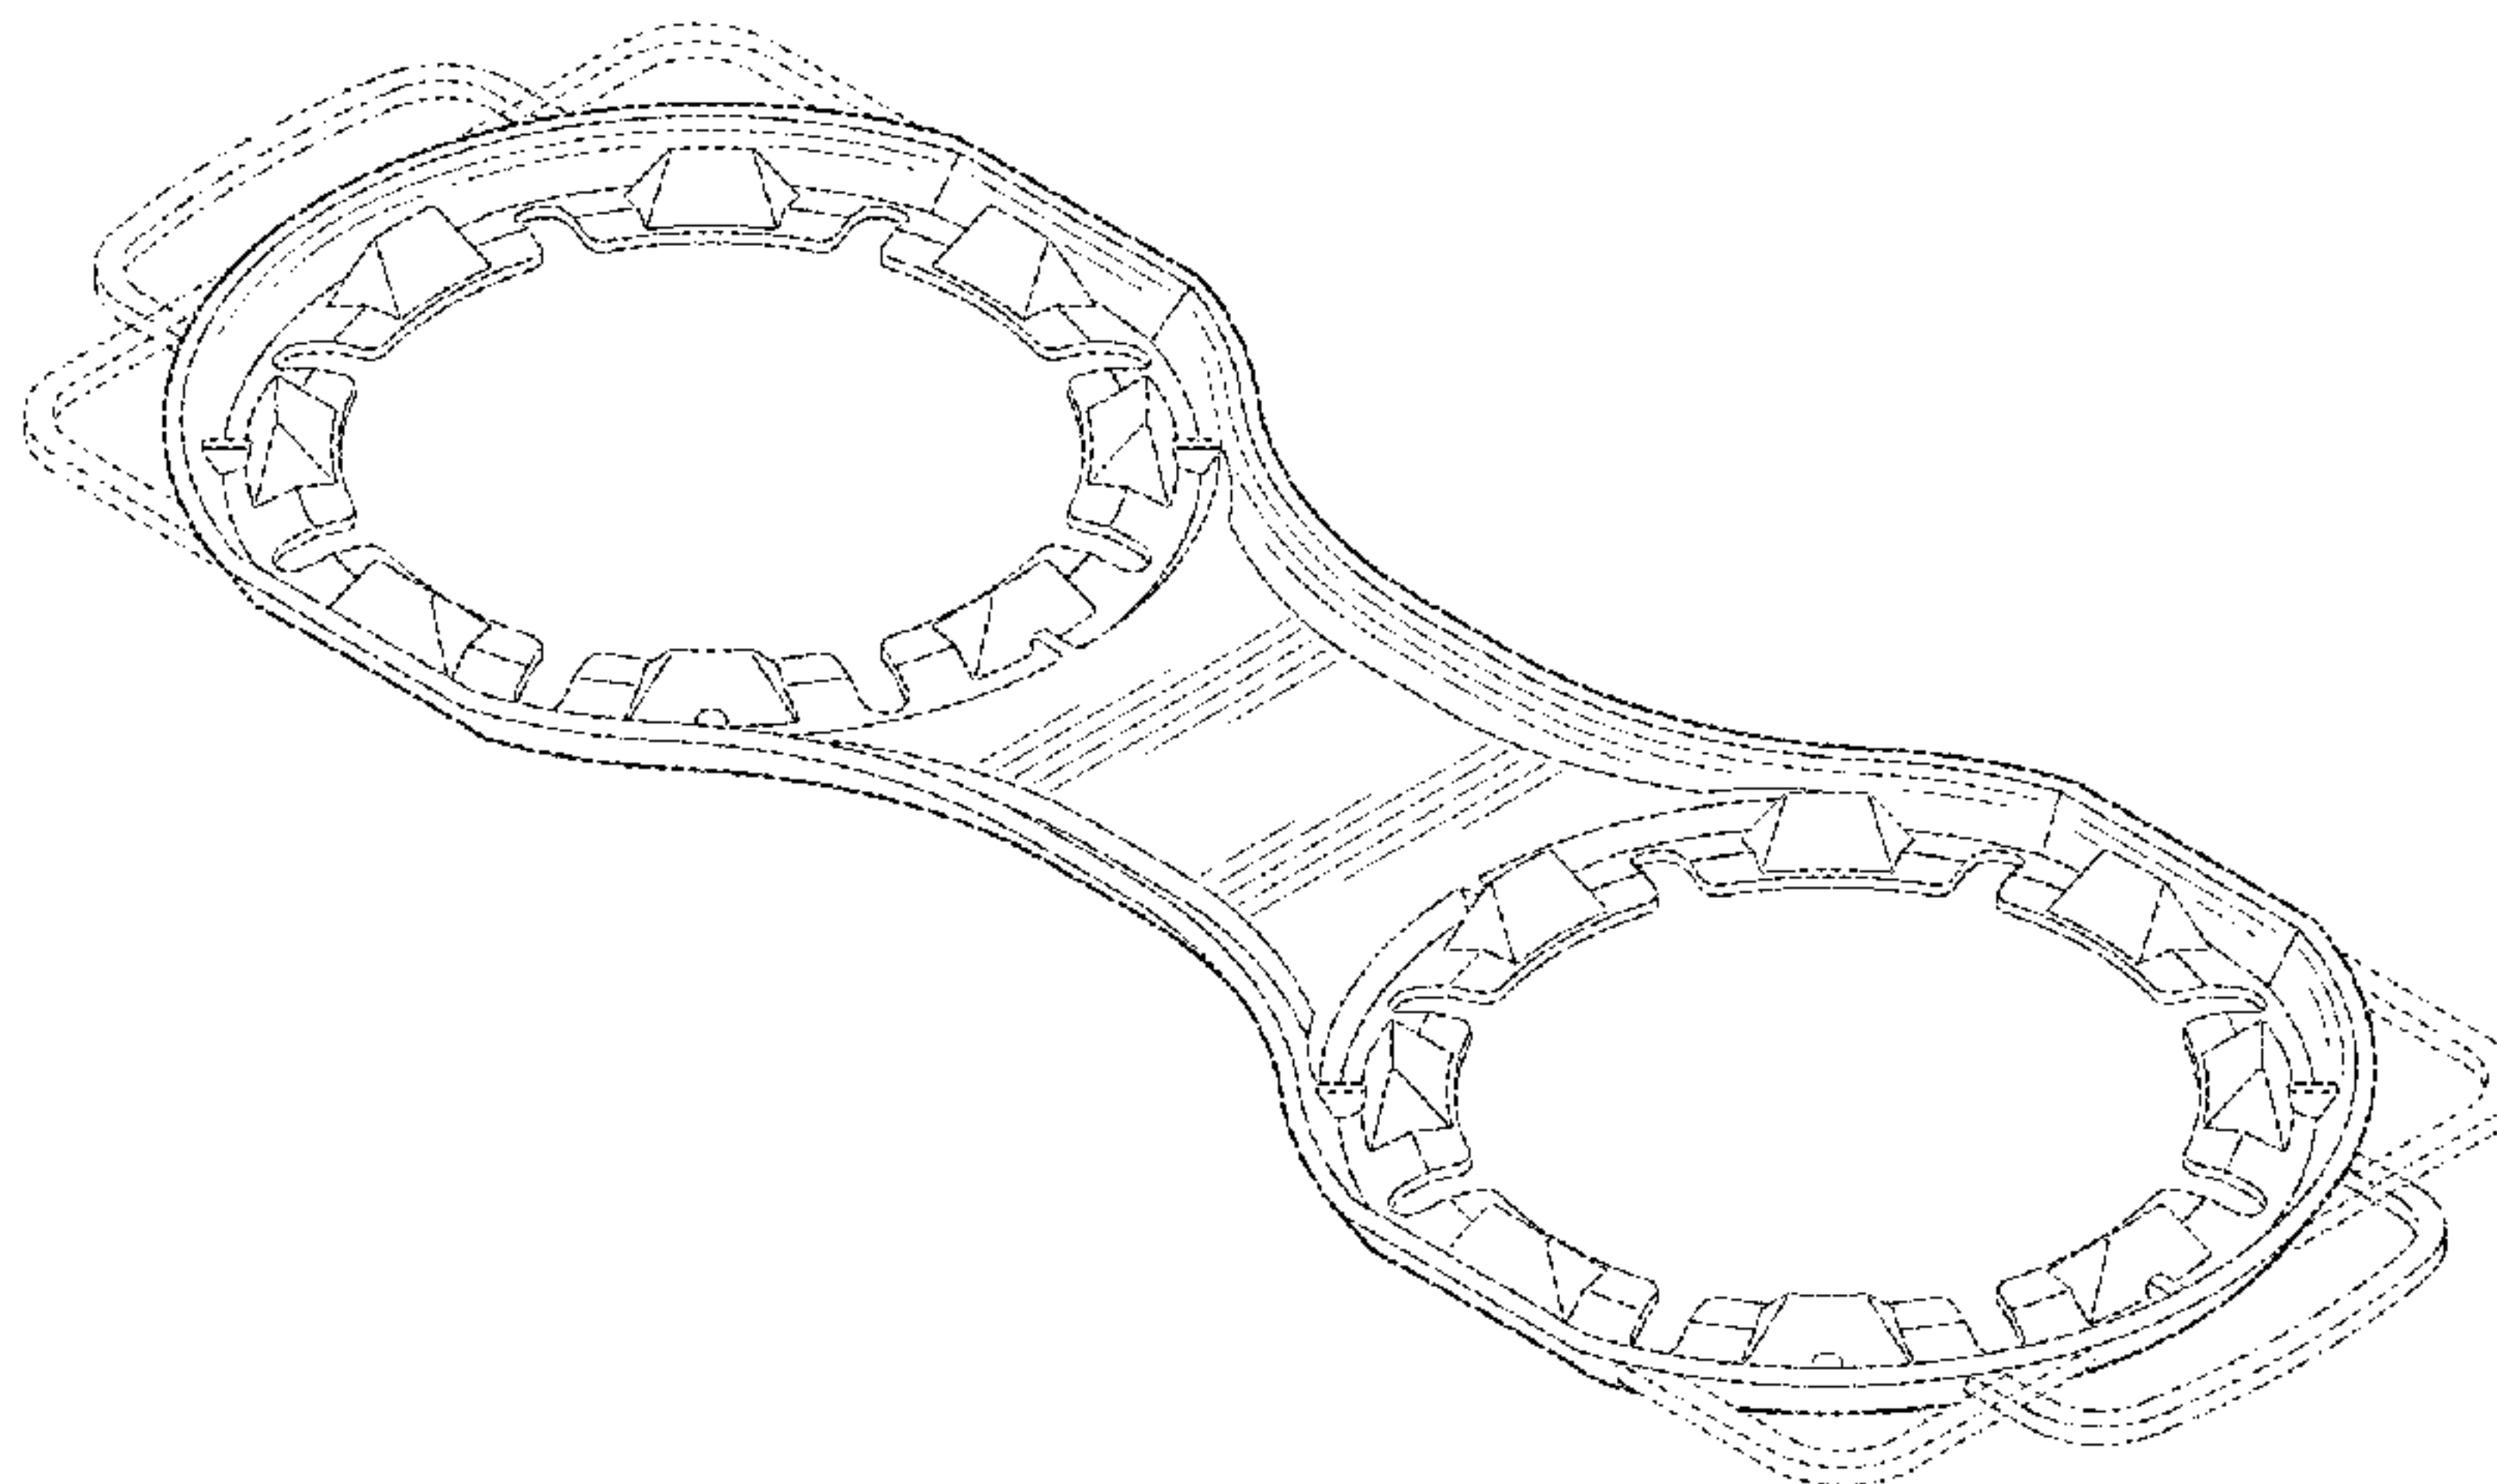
is a top right perspective view of an ornamental design for a stackable bottle carrier for carrying two bottles.
